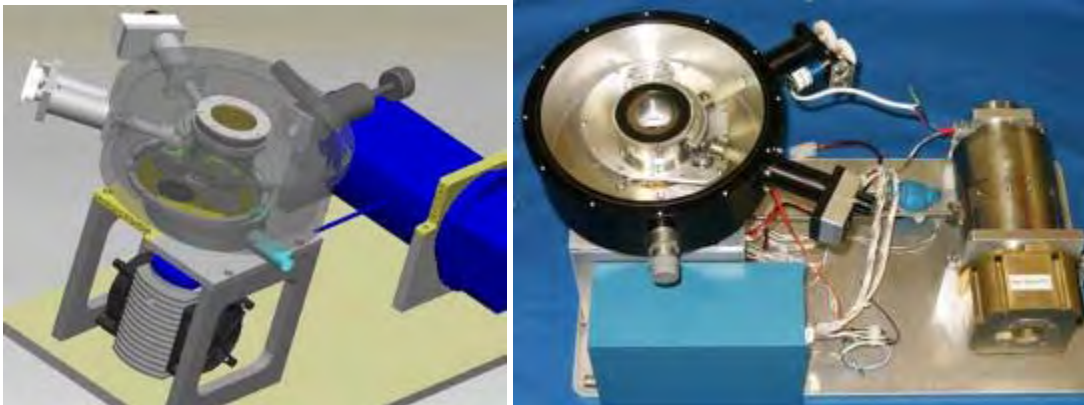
3D CAD model of the camera assembly with a 5 W Stirling cooler (left) and the actual parts without the lid on the vacuum enclosure (right).
